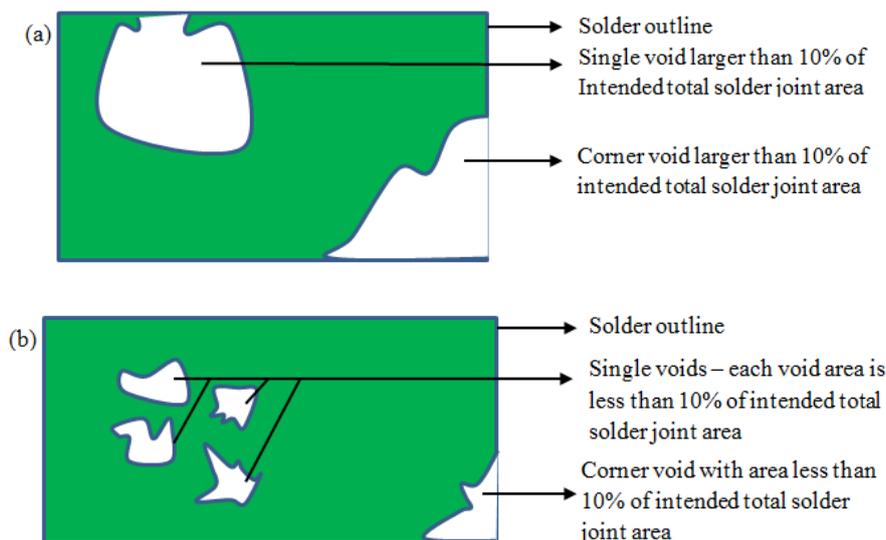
Schematics showing solder joint ultrasonic inspection criteria outlined in MIL-STD-883D(a) reject (b) accept
